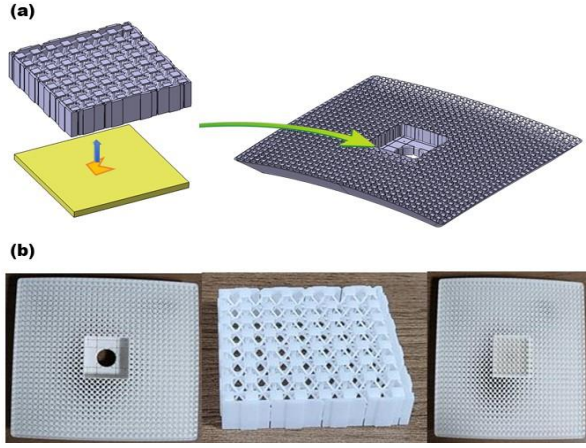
3D printed lattice core components. (a) Assembly of core base and core cap with EM radiator and (b) printed lattice core components
